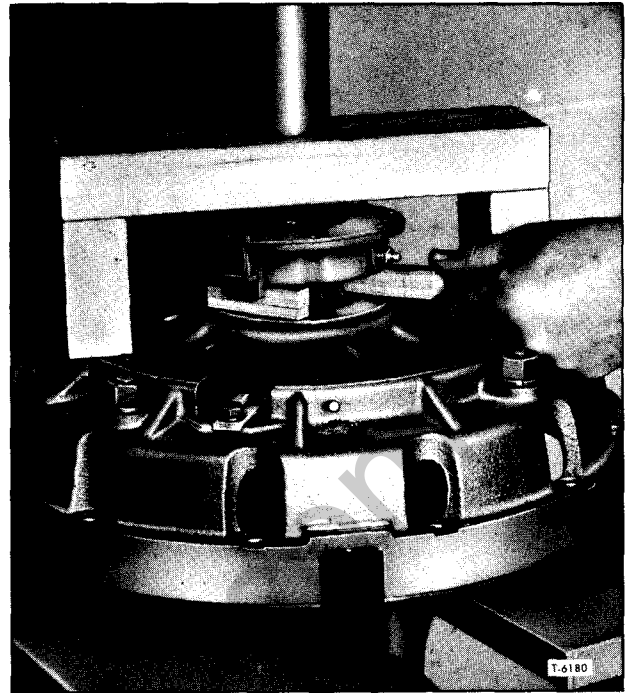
Installing Blocks Between Release Bearing and Spring Plate Hub
